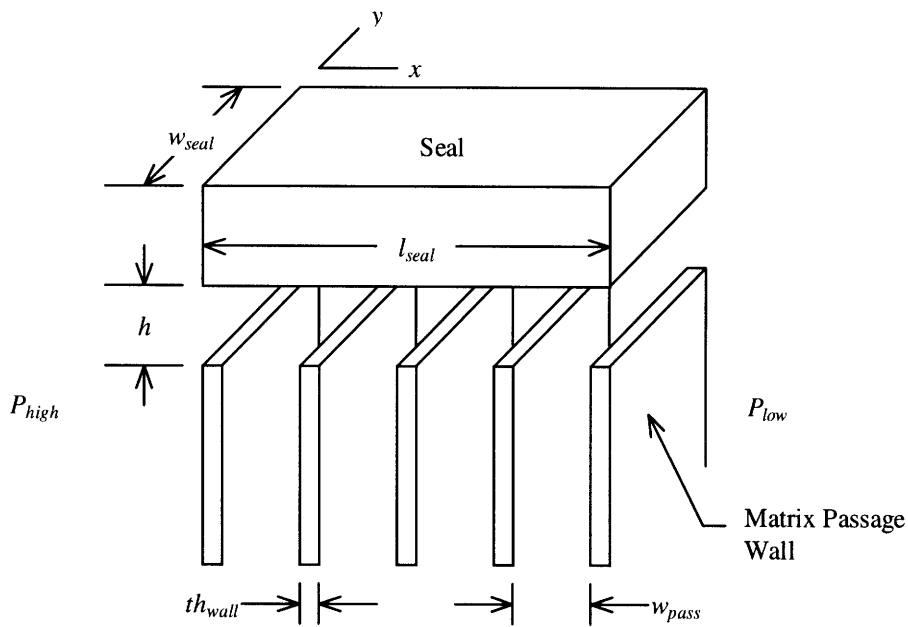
Diagram of seal along the module front and back faces showing relevant dimensions.
